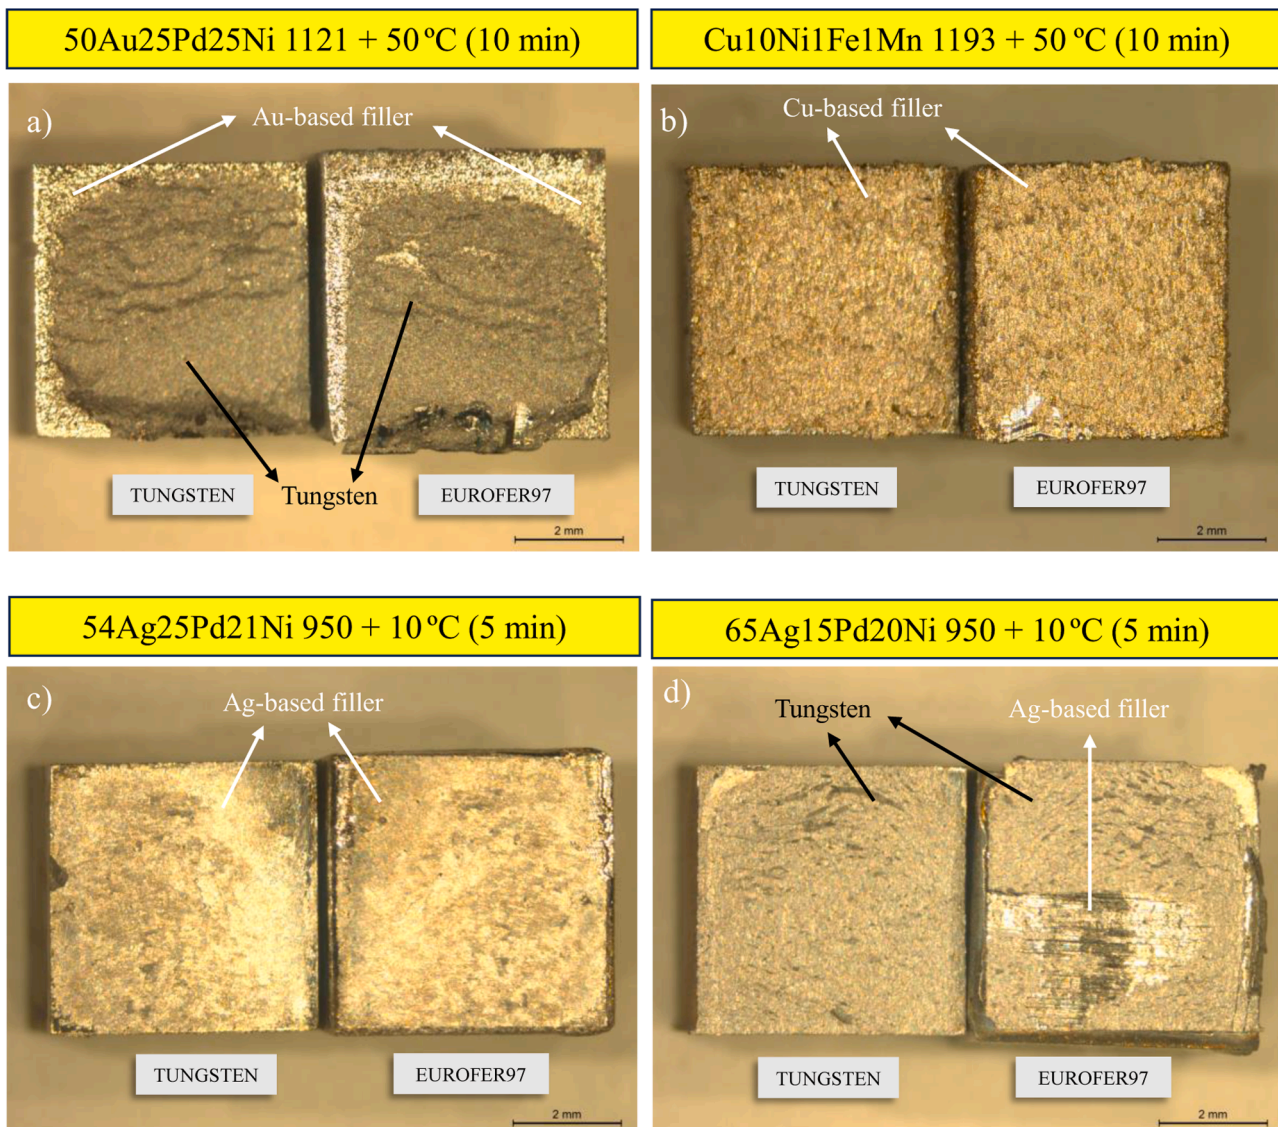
Fracture surfaces for the joints carried out with the different filler alloys.
